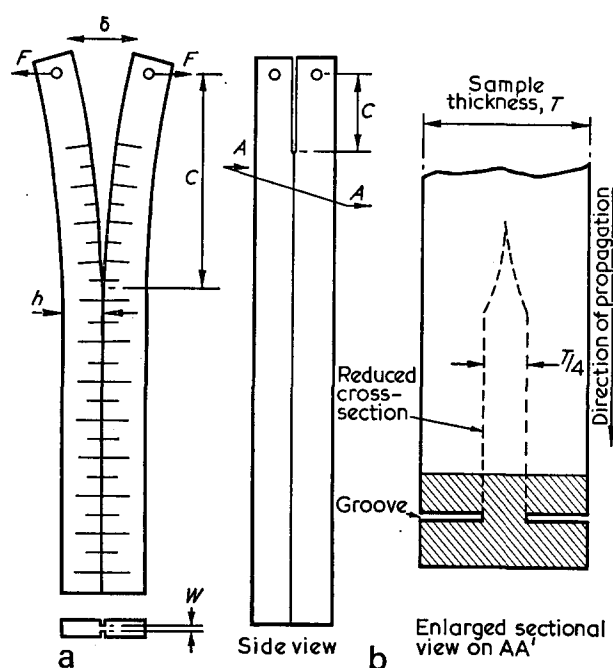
Machined sample. (a) Under load; (b) showing fish tail
